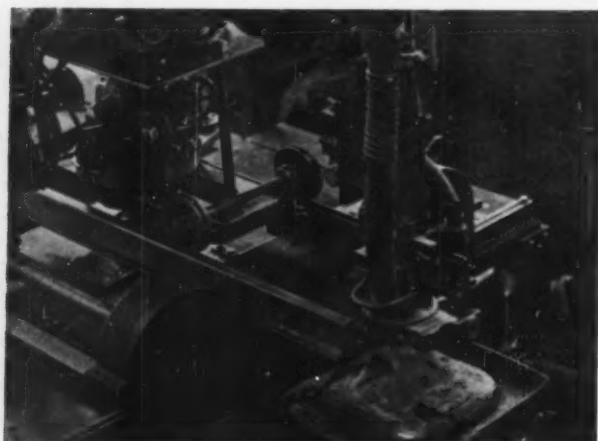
WELDING HEAD SPECIALLY MOUNTED TO MAKE SQUARE WELD
